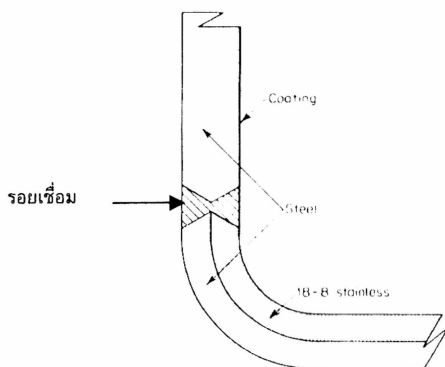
Detail of welded steel and stainless clad tank construction.
